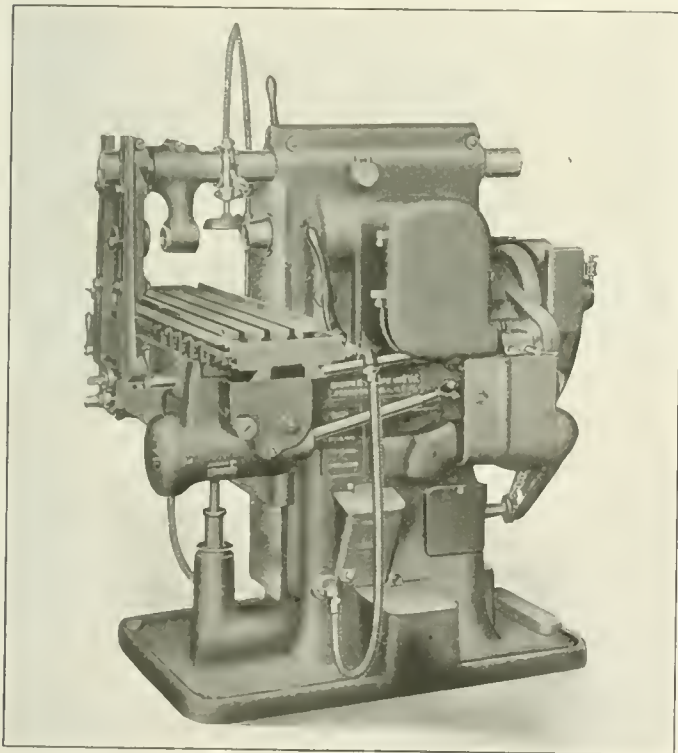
Brown & Sharpe No. 21 Automatic Milling Machine
